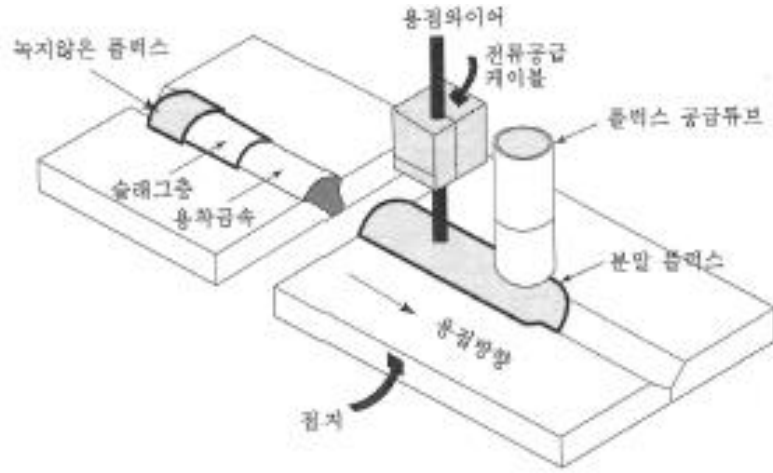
Principle of Submerged Arc Welding
